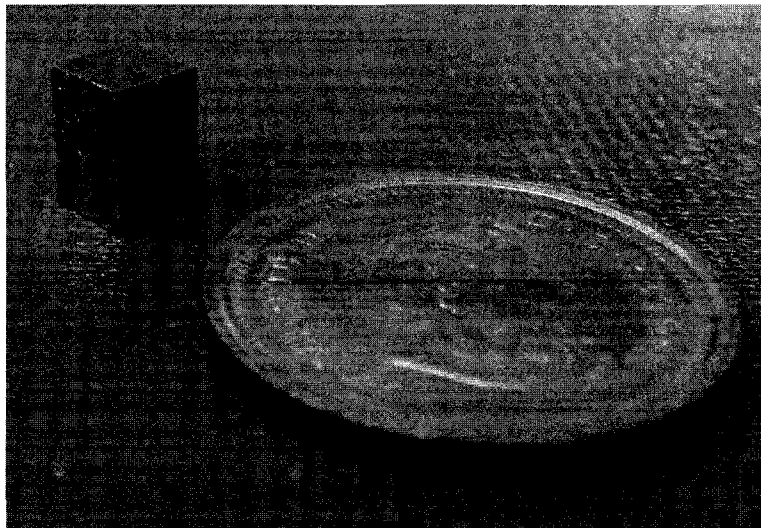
Compression Specimen after EDM Cutting and Grinding (with penny for size reference)
